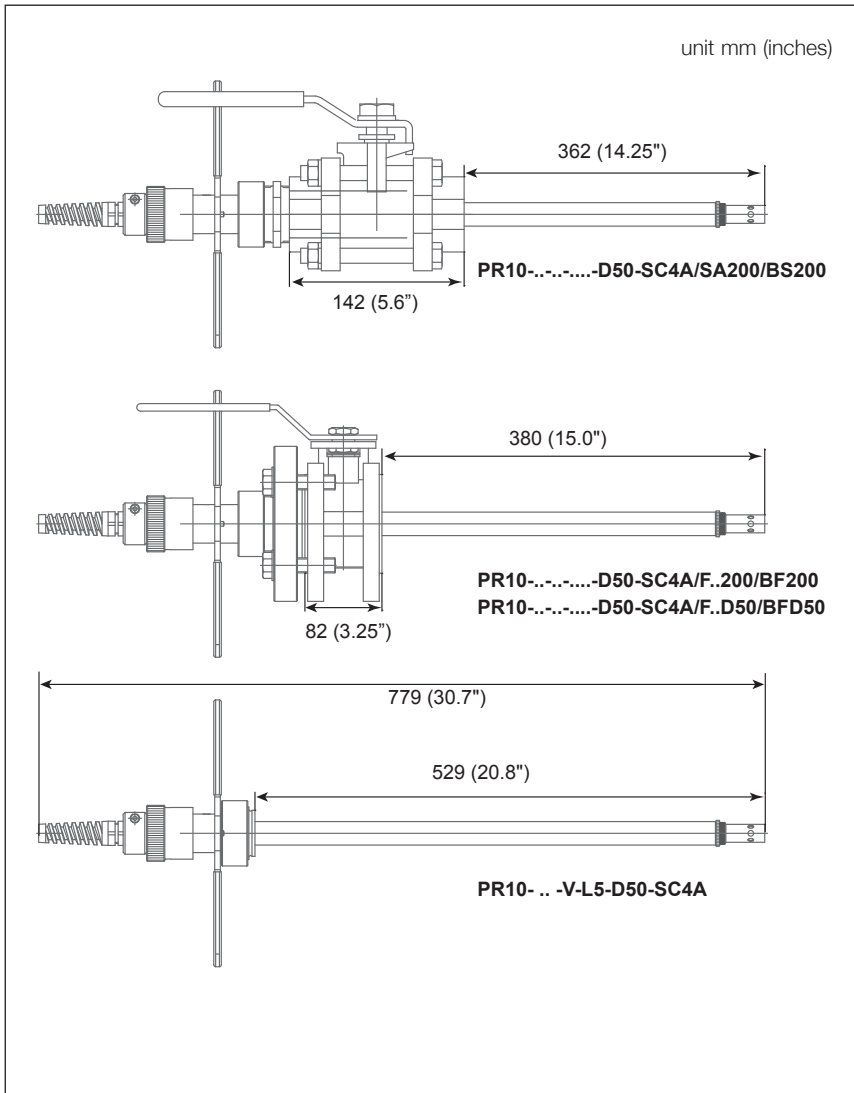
Dimensional drawing PR10...-D50 with mounted SC4A sensor
